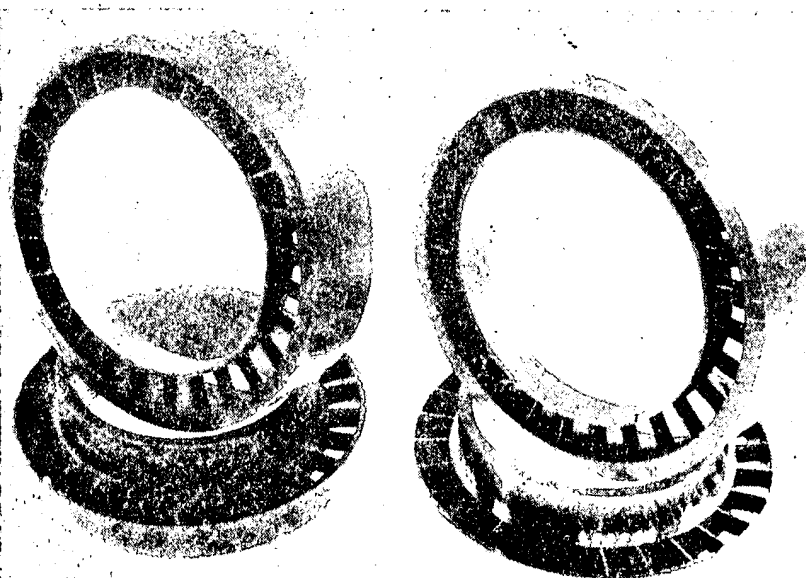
The Russian turbodrill T14—9 $\frac{3}{4}$ -inch is remarkably like the Scharpenberg design except for the sliding rubber thrust bearing.
